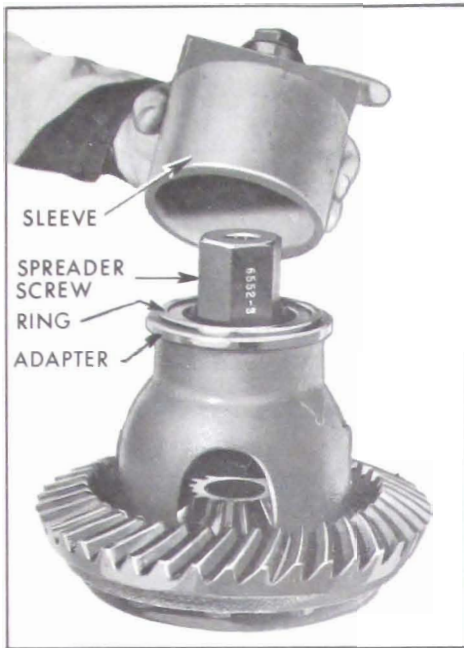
Installing Sleeve to Remove Bearing Outer Race
